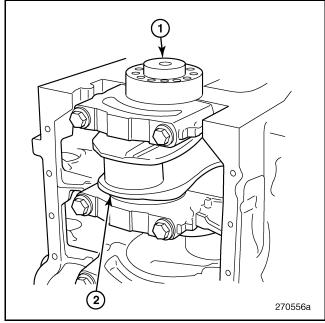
No. 1 Cylinder (Crankshaft at BDC)
